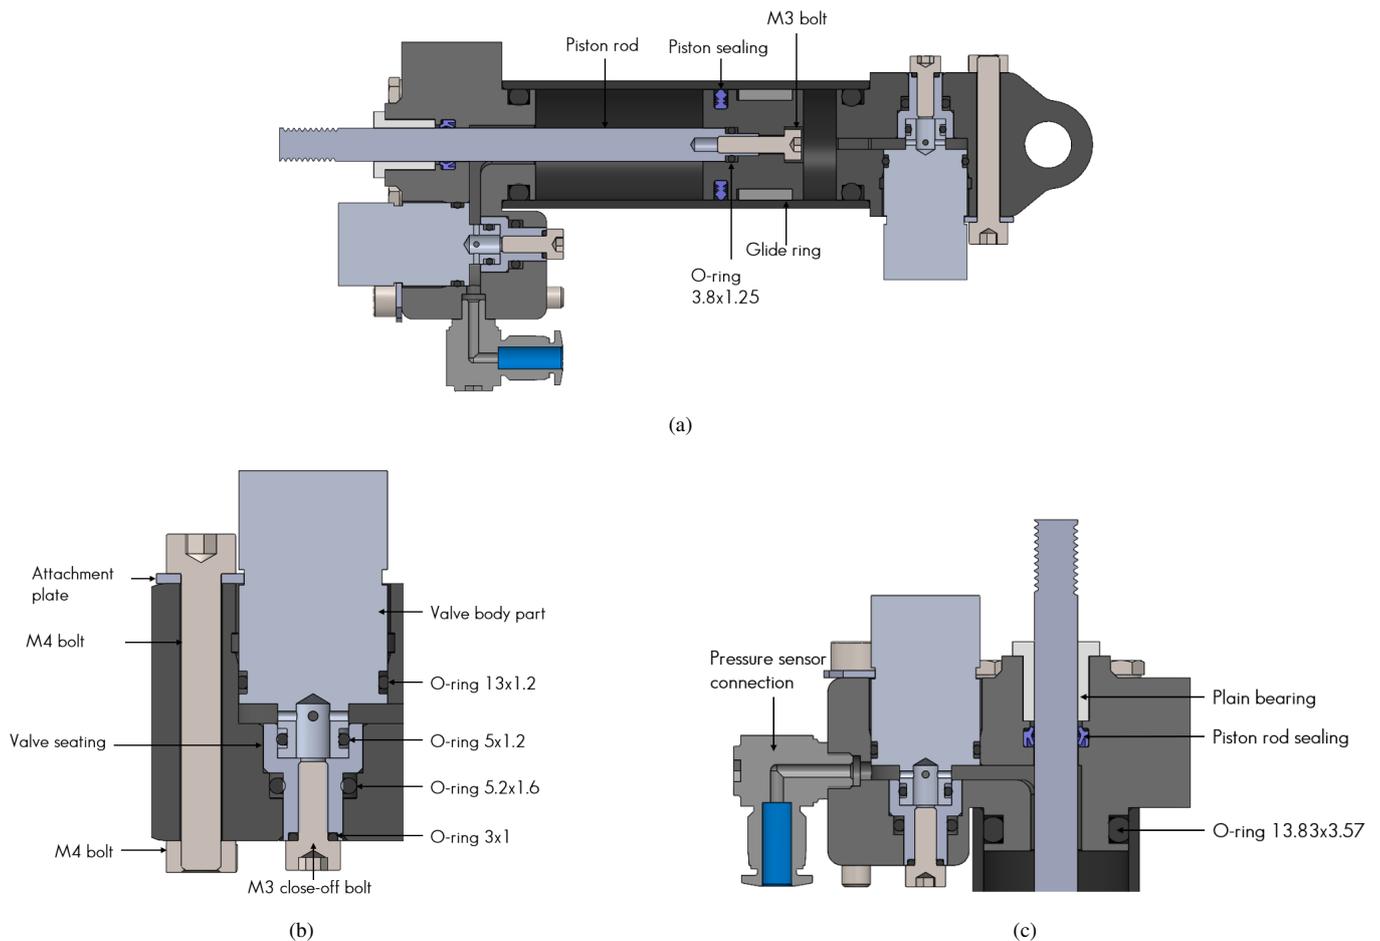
(a) Section view of the 3D-printed pneumatic cylinder with annotations of the piston rod assembly. (b) Section view of the valve and valve seating assembly. (c) Section view of the cylinder head with annotation of functional parts
